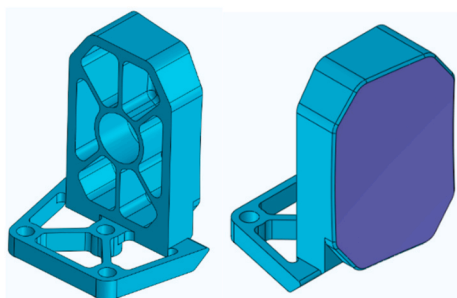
Preliminary 3D drawing of the parabolic mirror.
